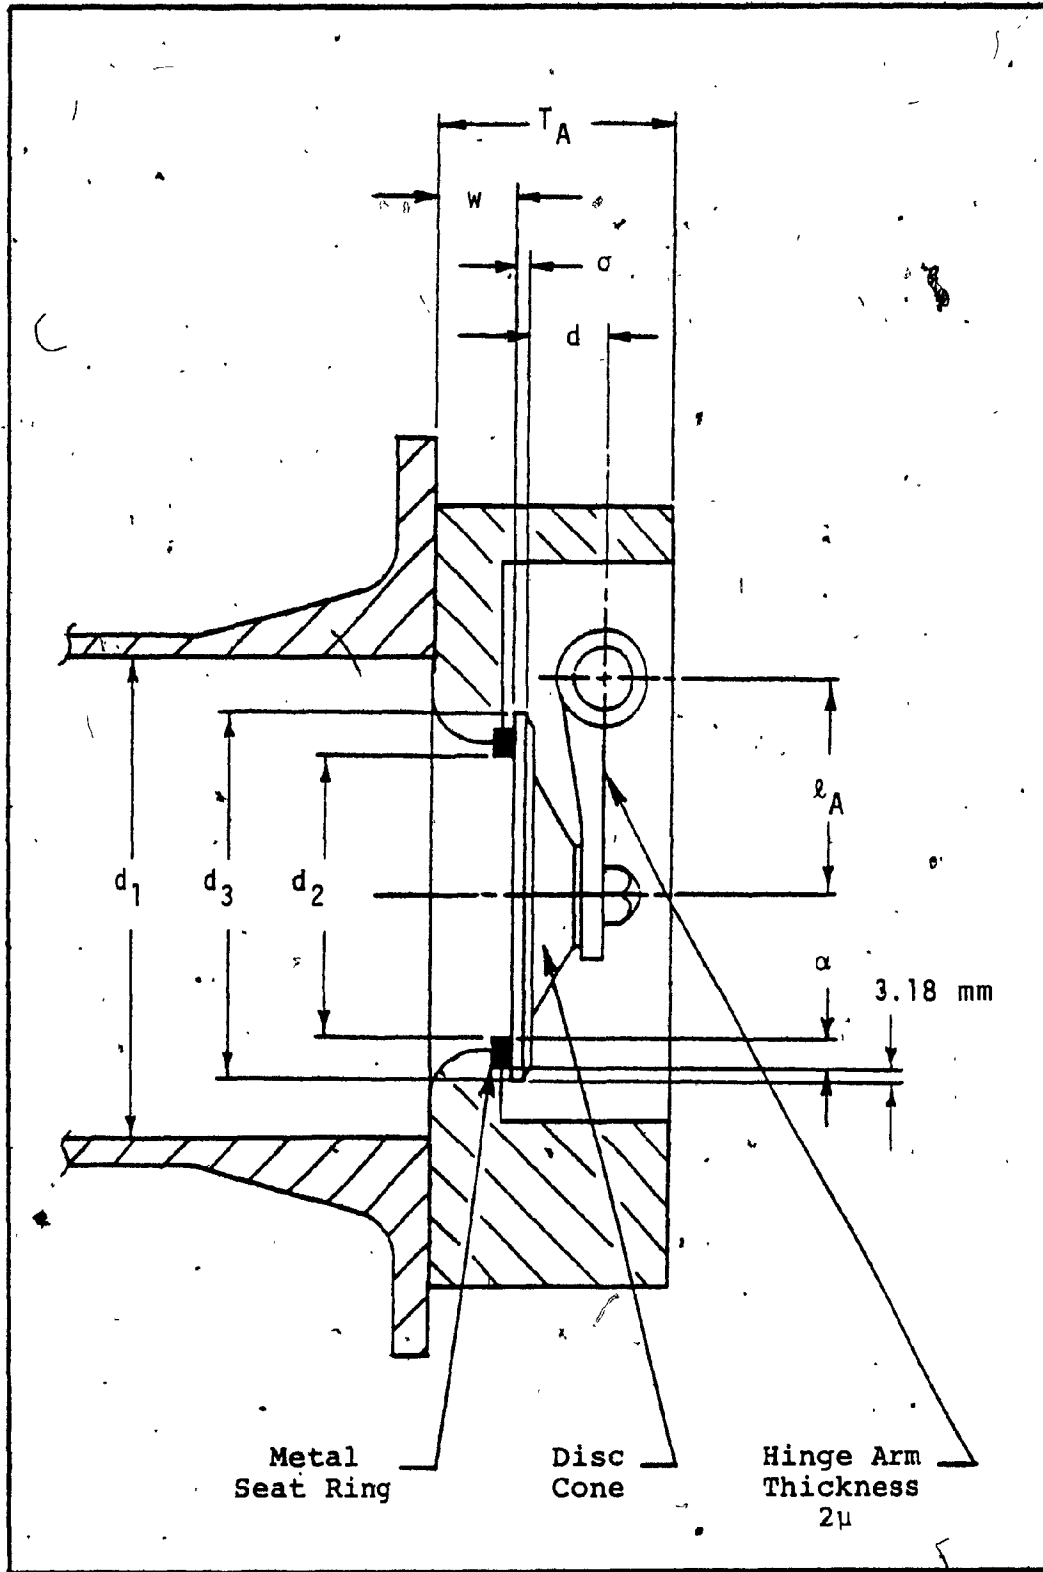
Basic Design of Ritepro Wafer Valve (hard seat seal type)
